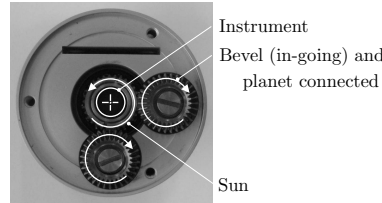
$\Theta Z$ -manipulator: gear-set of the Z-drive, stacked below the friction-wheels and bevelgears of Figure 4.18.
